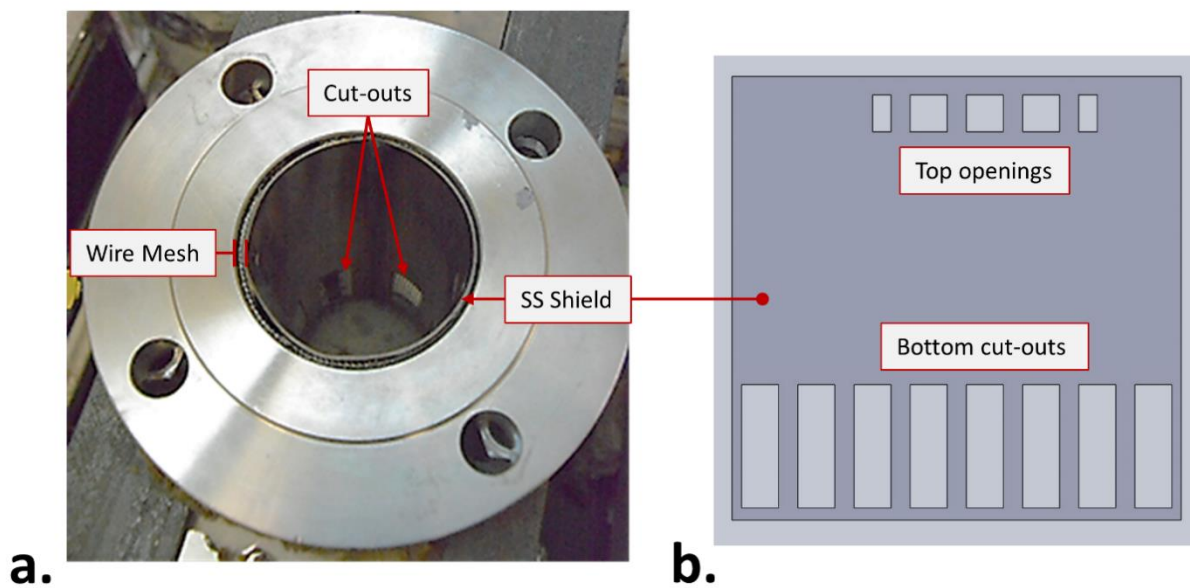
a) R3.1 with stainless steel shield and wire mesh installed, b) drawing of the shield before it was rolled and welded (right)
